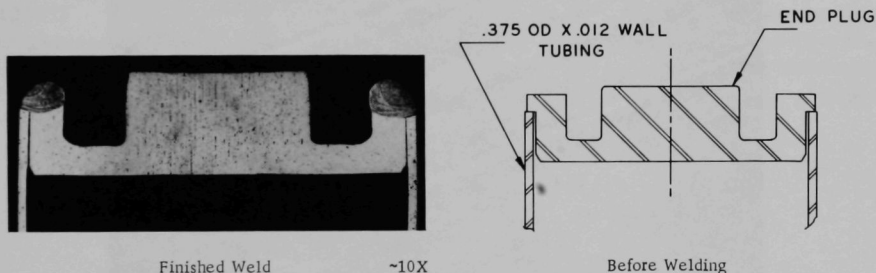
ZPPR Oxide Rod. Weld configuration in Type 304 stainless steel.
